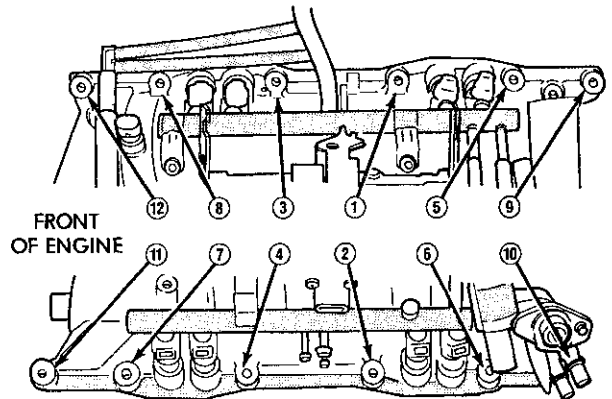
Intake Manifold Bolt Tightening Sequence—V-8
